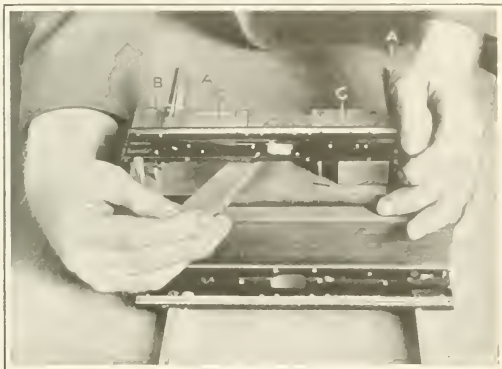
Fixture for assembling Folding Arms to Carriage Bed Plate
